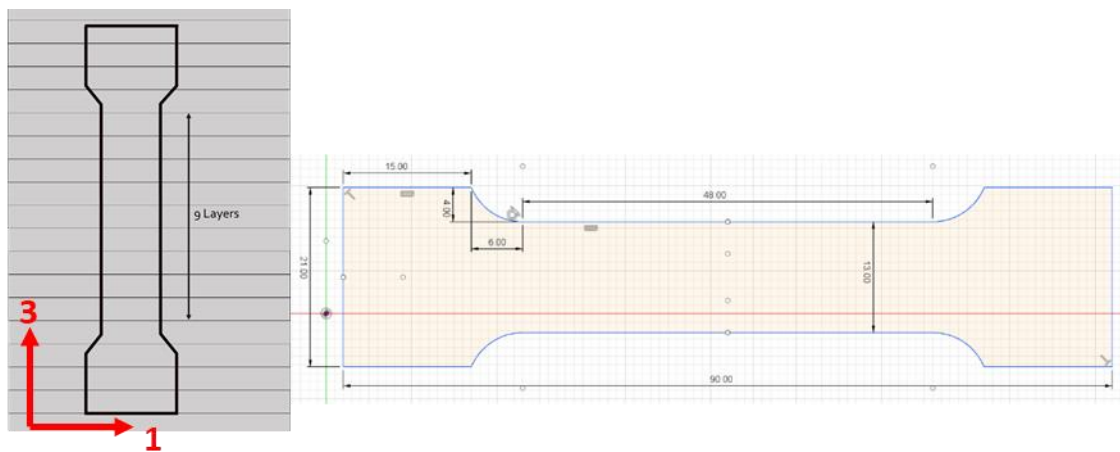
Dimension of the Tensile Specimen in the 3 Direction
